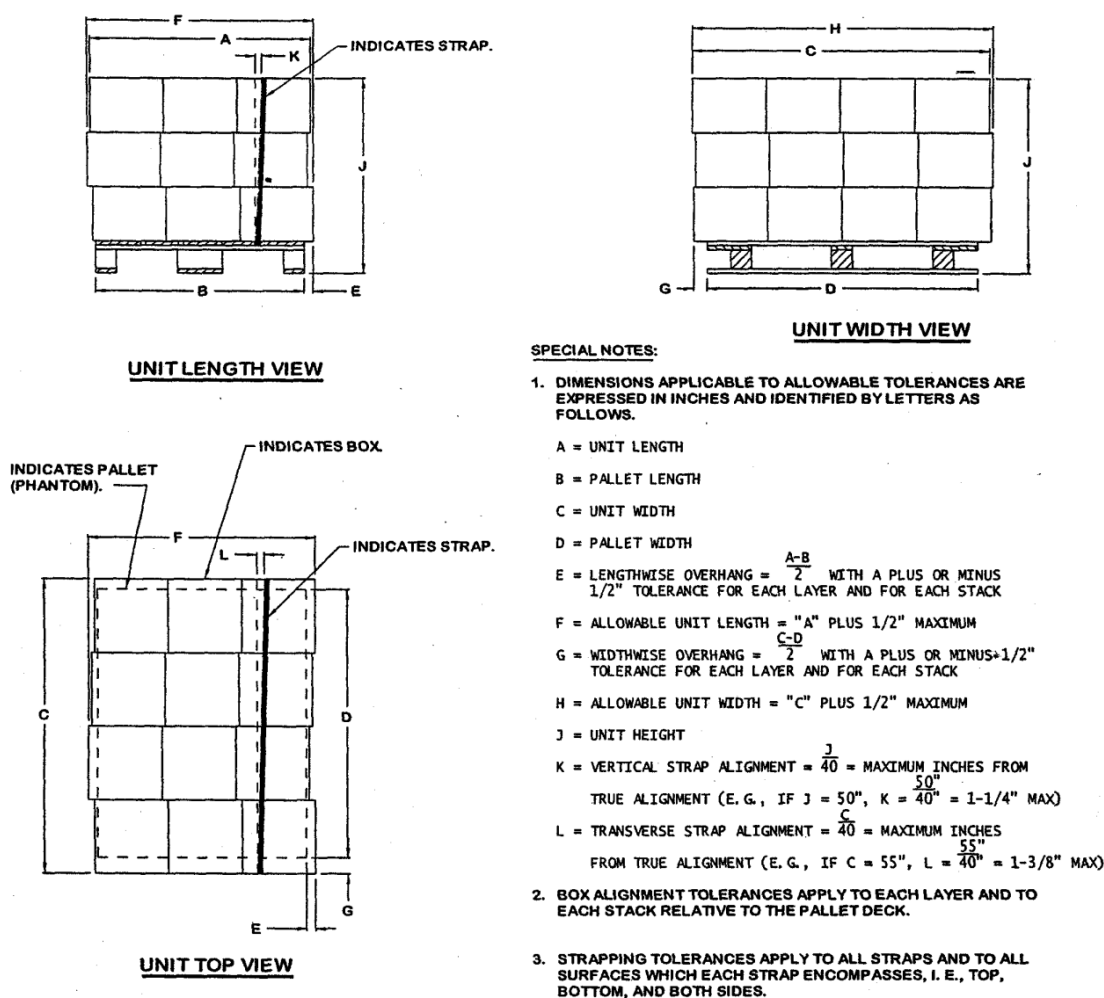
Allowable tolerances for assembling units.
